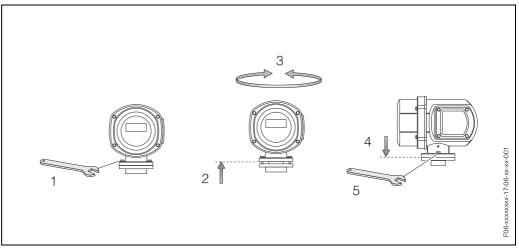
Turning the transmitter housing (stainless-steel field housing)
